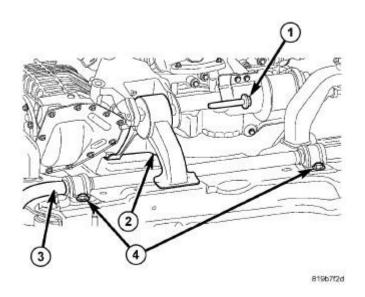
Rear Engine Mount & Transaxle Bracket Courtesy of CHRYSLER LLC
